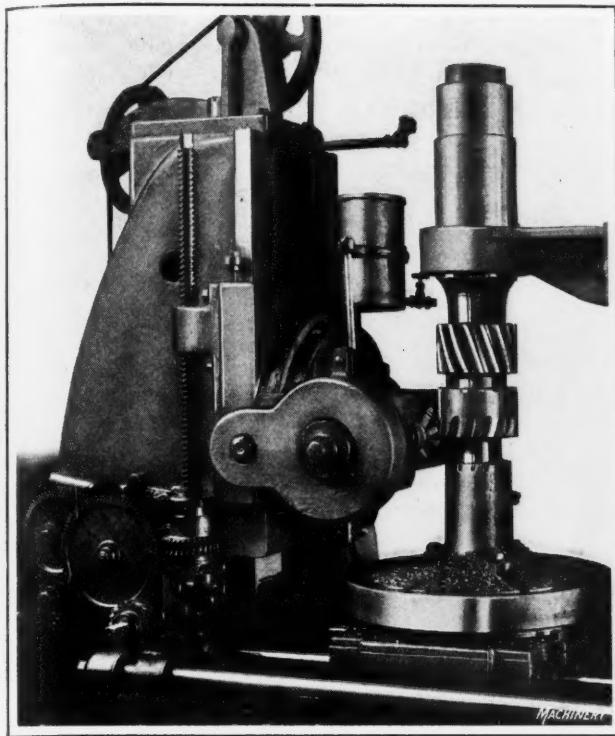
Using Multiple-threaded Hob set at Right Angles to Axis of Gear
